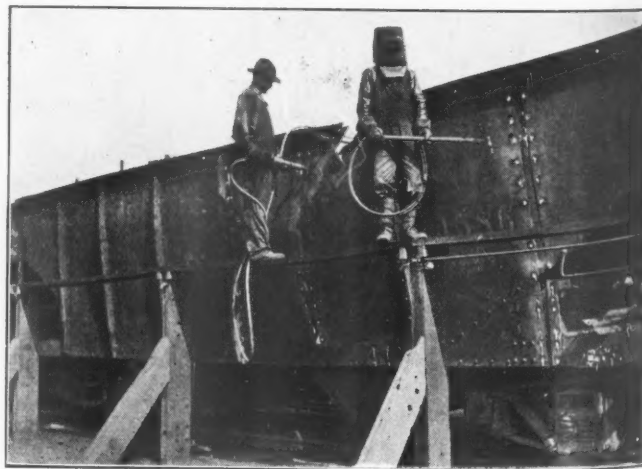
After the Rivet Heads Are Burned Off the Rivets Are Backed Out With a Pneumatic Tool
